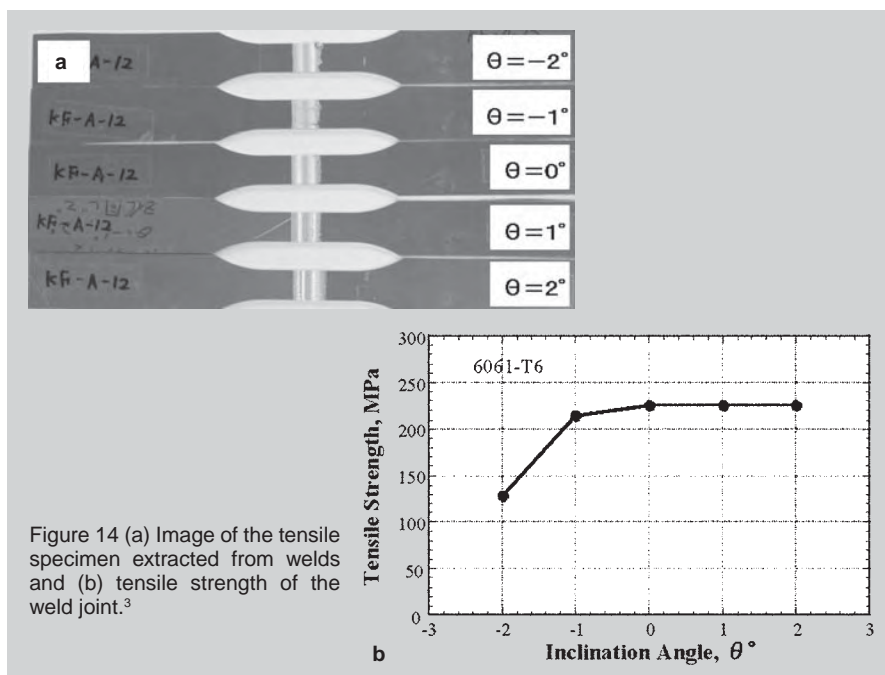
(a) Image of the tensile specimen extracted from welds and (b) tensile strength of the weld joint.³
